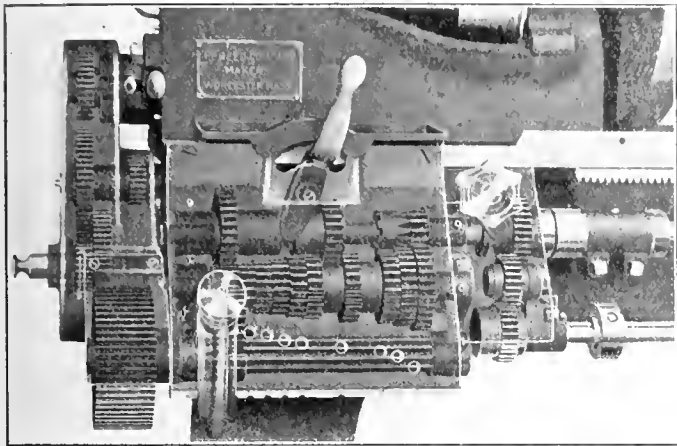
The Quick-change Gear Mechanism of the F. E. Reed Co's Lathe
